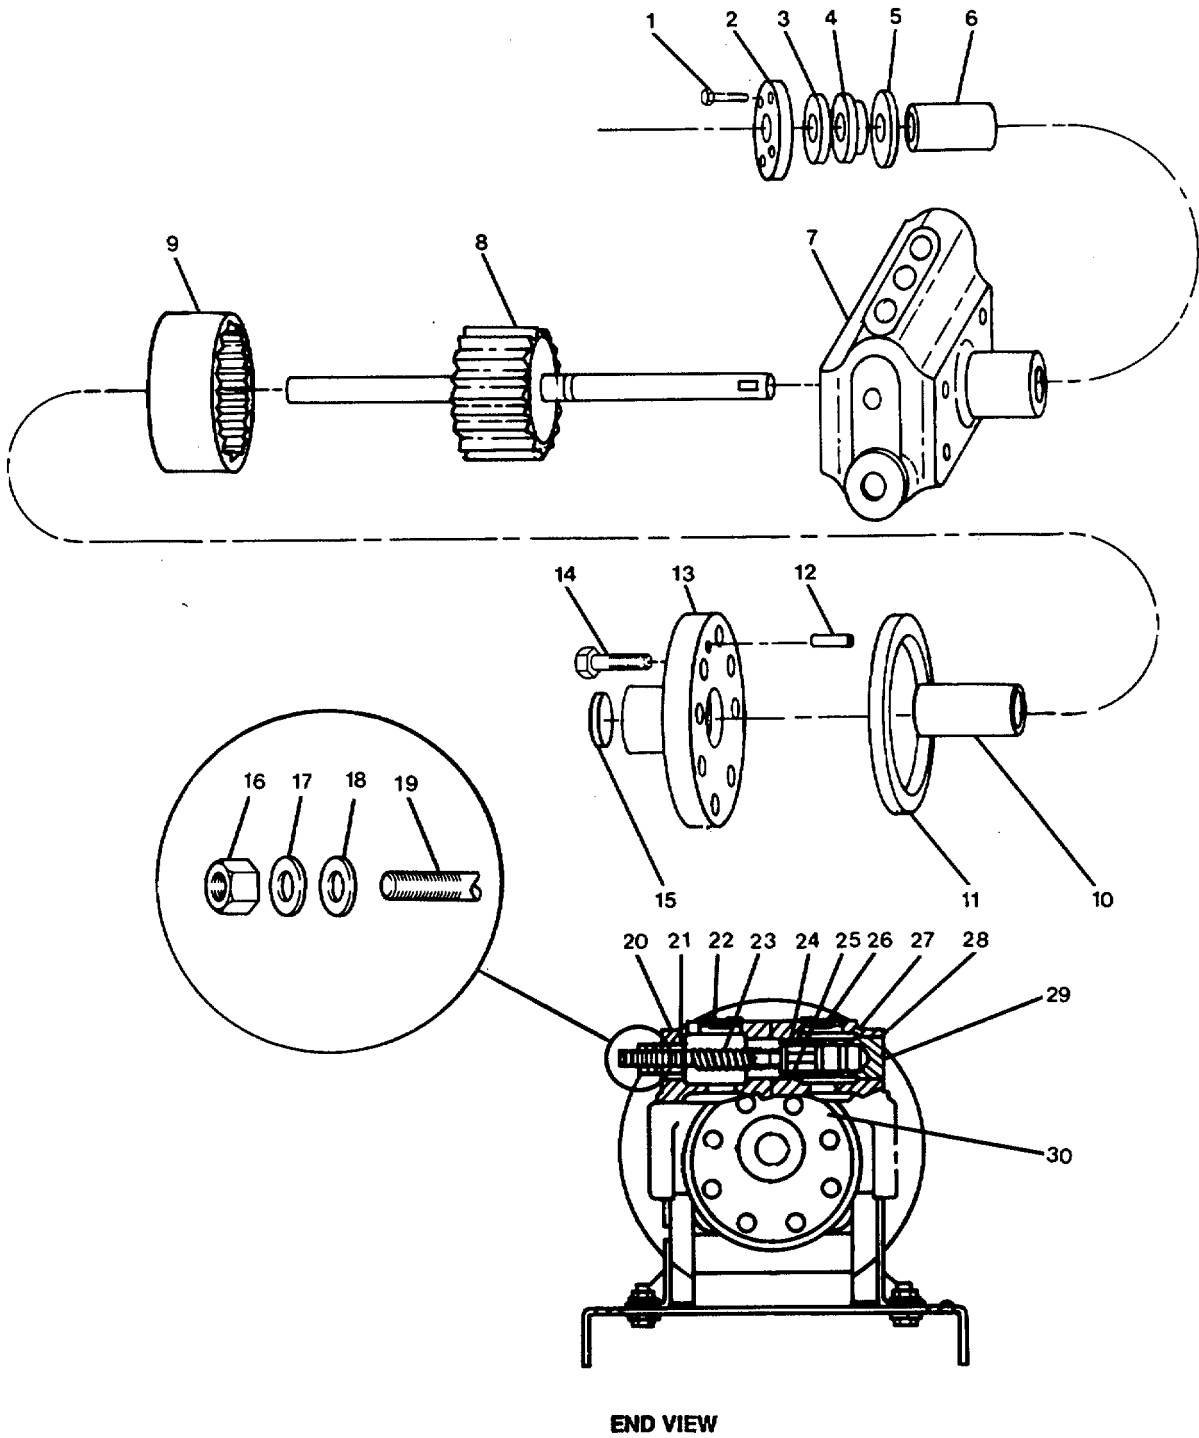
Rotary pump and Relief Valve Assembly.
